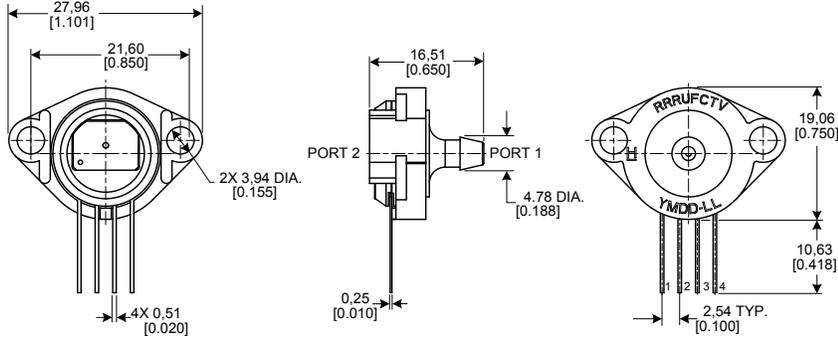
SIP Package Dimensional Drawings (For reference only: mm [in])
